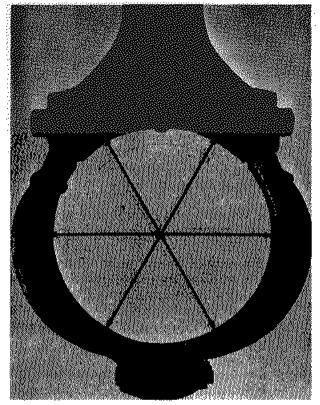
Checking Fork Rod Bore5. Fork rod rework will be required for any of the following conditions:
